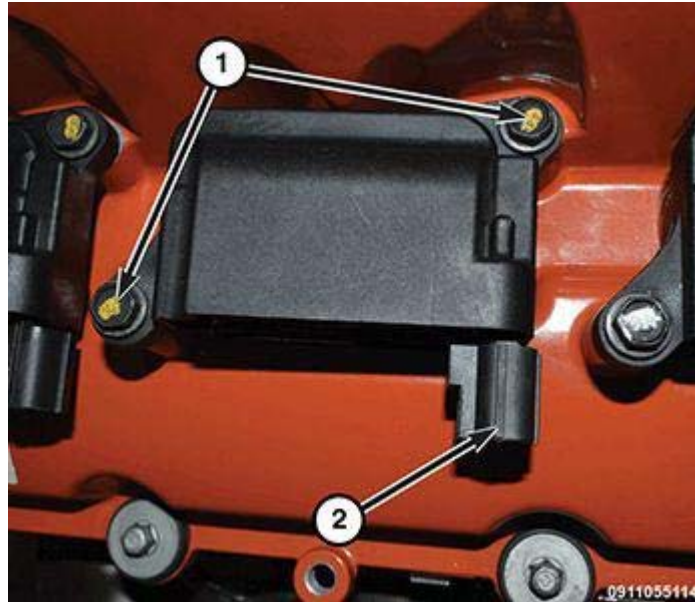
Ignition Coil Wire Harness Connector & Bolts
